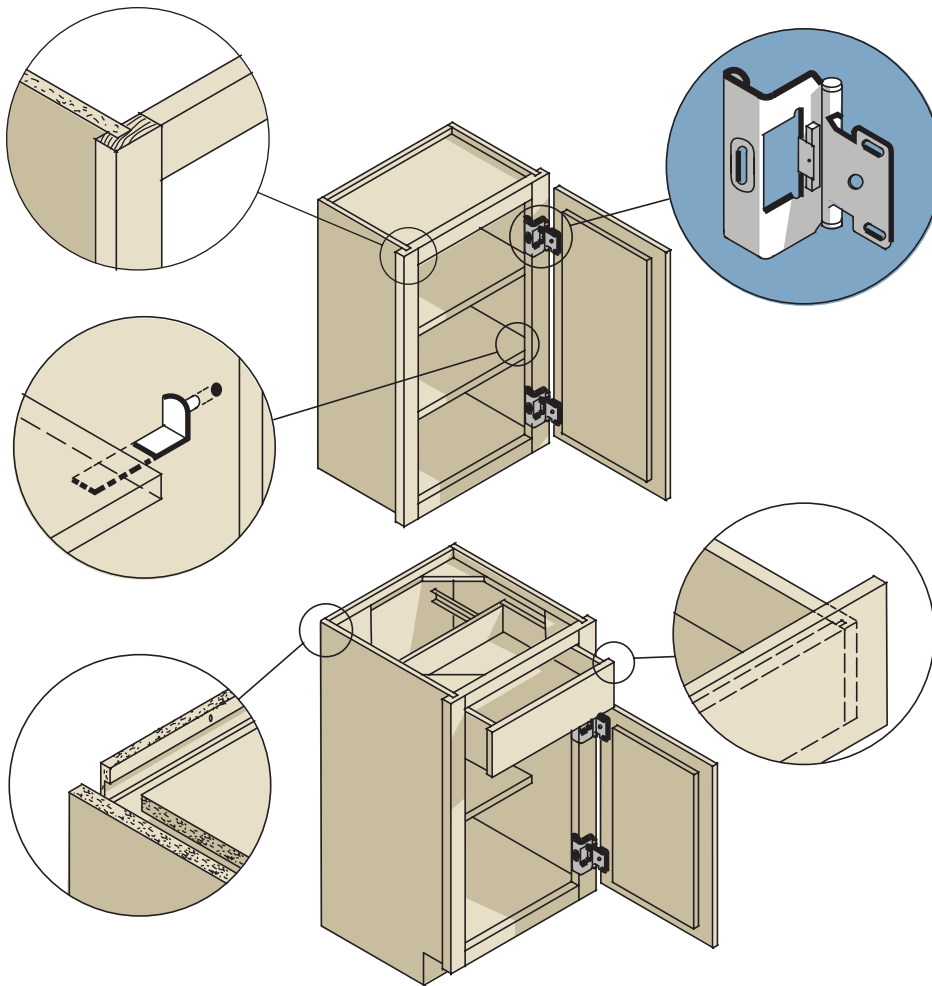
Typical framed cabinet component parts. Framed cabinets are fitted together with various forms of wood joinery and without special hardware fittings. Door hinges attach to face frame and generally do not have multiple adjustments.
